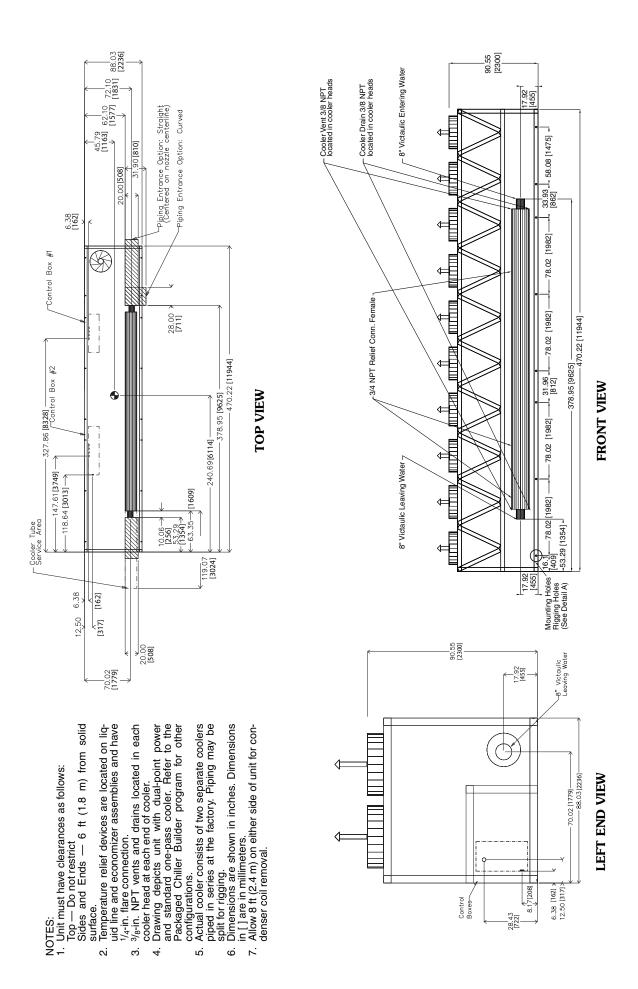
30XA400 Air-Cooled Liquid Chiller with Dual Point Connections Dimensions
